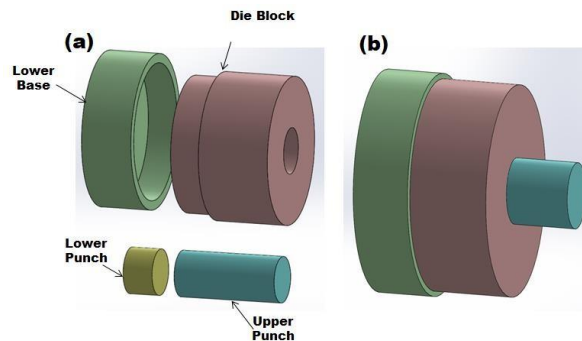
(a) 3D design exploded view of the die and punch (b) Assembly view of Die-set.
